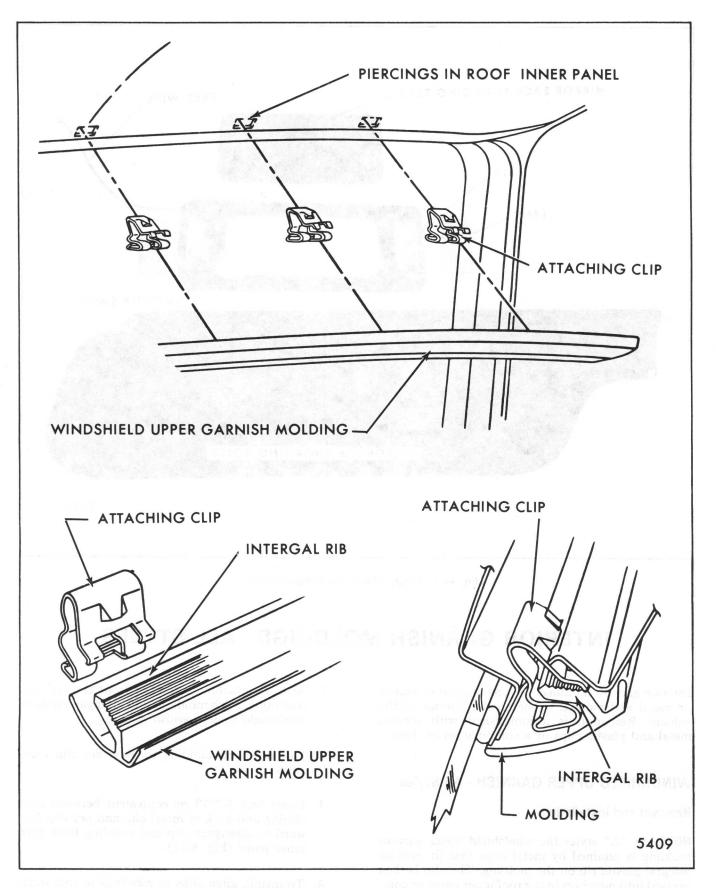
Windshield Upper Garnish Molding - "A" Styles
